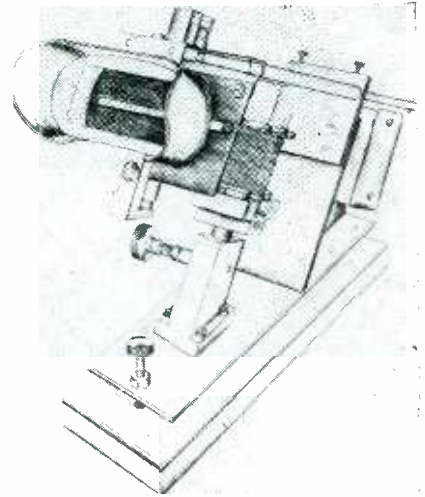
Grid adjustment fixture for viewing lateral grid wires
